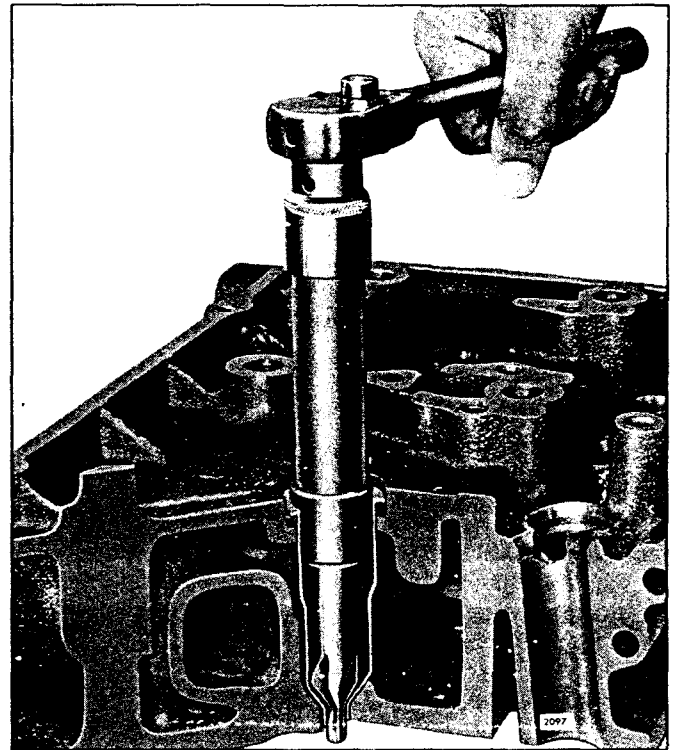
Reaming Injector Tube for Injector Nut Using Tool J 5286-9
